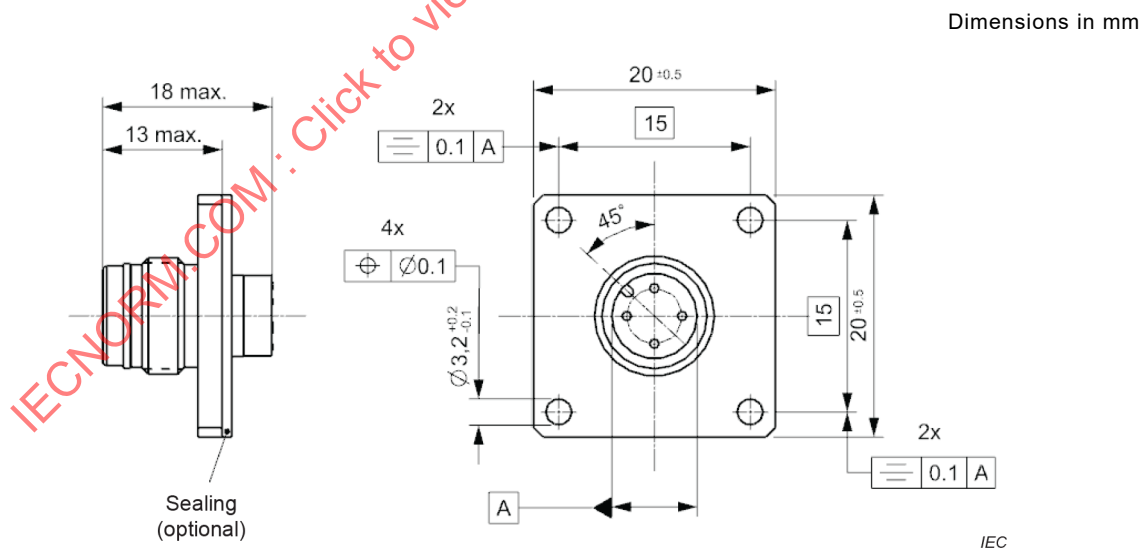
Fixed connector, male contacts, with M12 screw locking and outer push-pull locking, square flange front mounting
